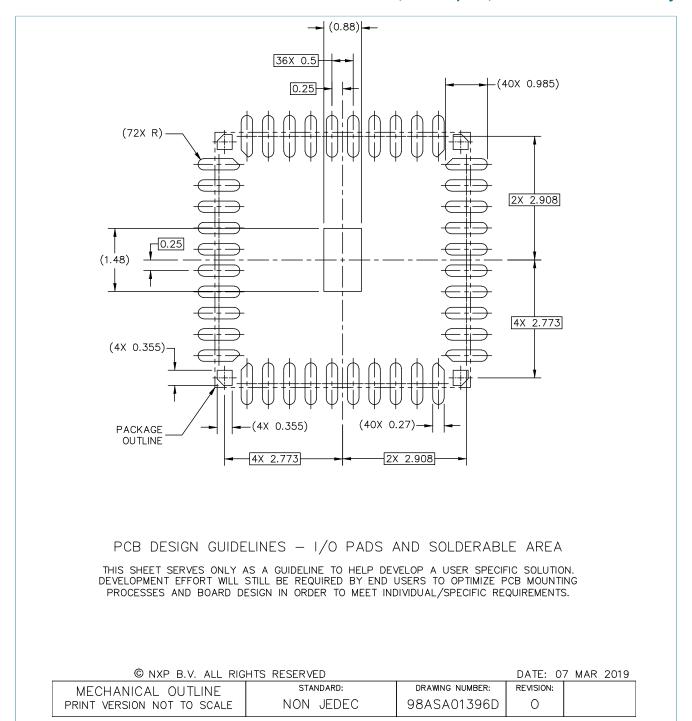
Reflow soldering footprint part2 for HVQFN40 (SOT618-16(SC)
